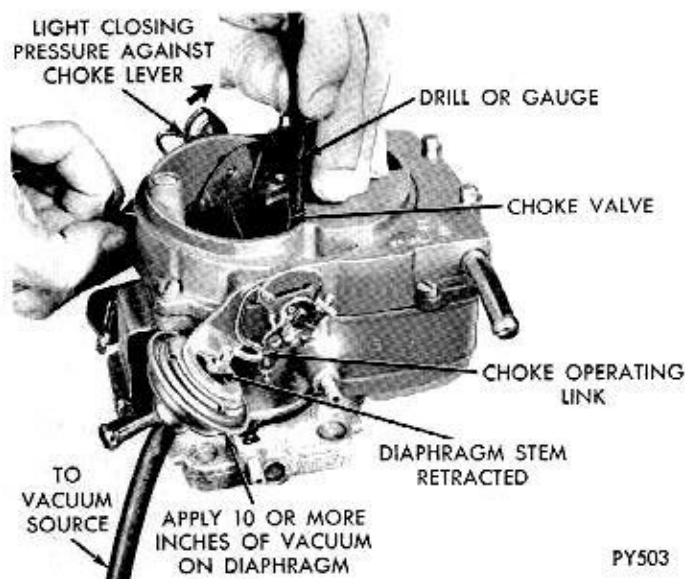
Checking Choke Vacuum Kick Setting (Wide Open Kick)
